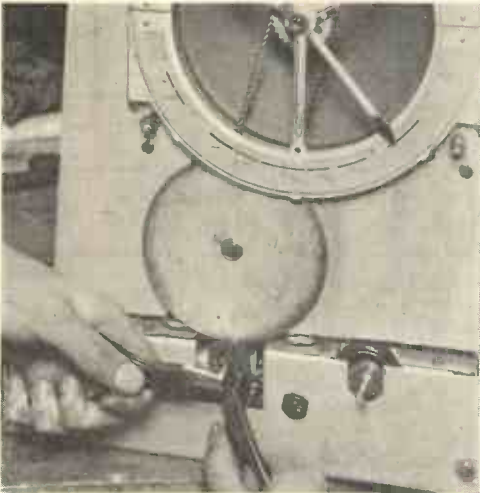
TIGHTENING UP THE DRIVE WASHERS.
